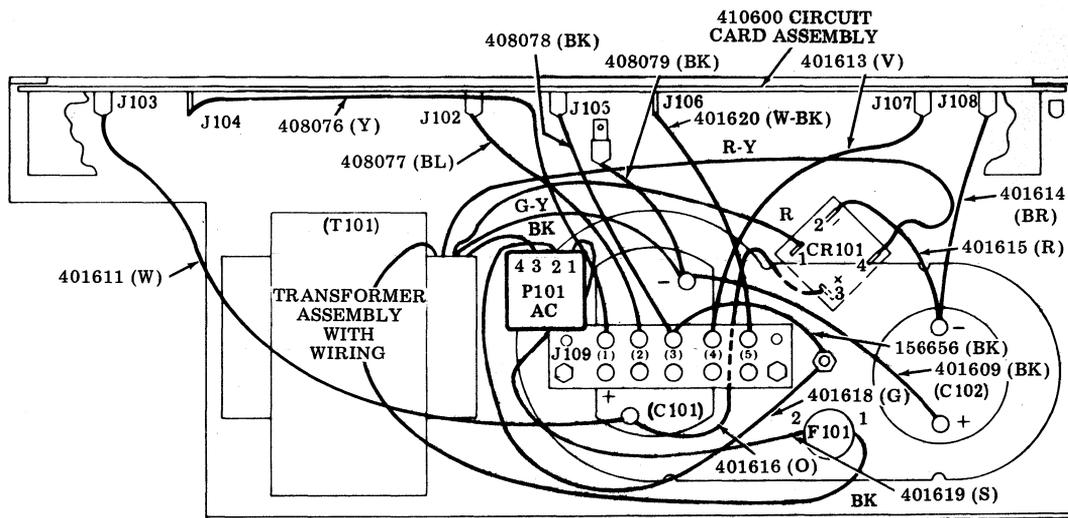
410600 Circuit Card Assembly (Late Design) Customer Identification Issue 6A or Later
